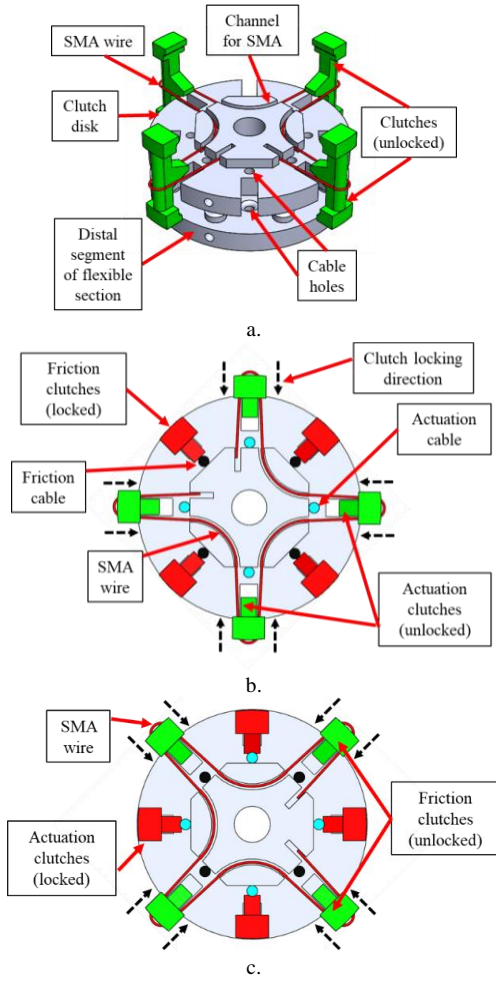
Clutch design: a. Design of a single set of clutches, with the channel for the SMA wire exposed; b. Top view of a clutch with actuation cables unlocked and friction cables locked; c. Top view of a clutch with actuation cables locked and friction cables unlocked.
